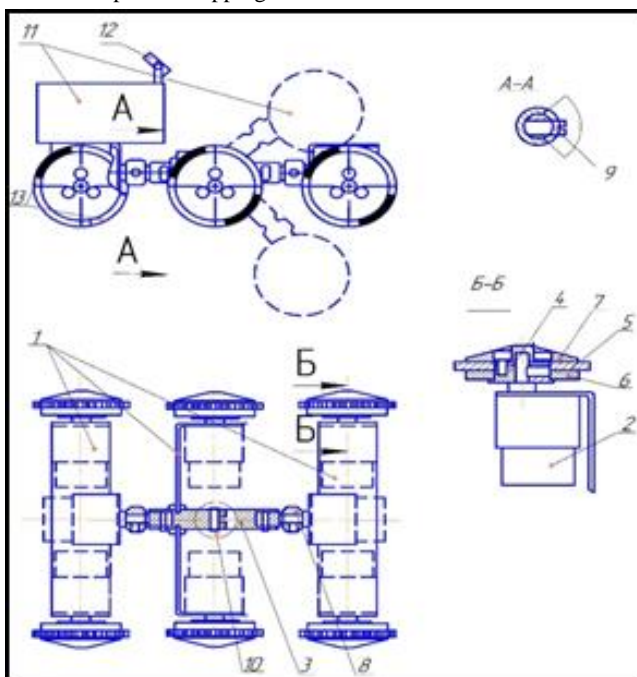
A platform for a magnetic-wheeled pipe flaw detector, where: 1 - chassis; 2 – a gear motor; 3 - longitudinal axis; 4 - an intermediate bush; 5 – a wheel; 6 – a ring magnet; 7 – a non-magnetic plate; 8 – a bush; 9 – a stop; 10 – a transverse joint; 11 – the technique of the trolley; 12 – a video camera; 13 - non-magnetic inserts.
